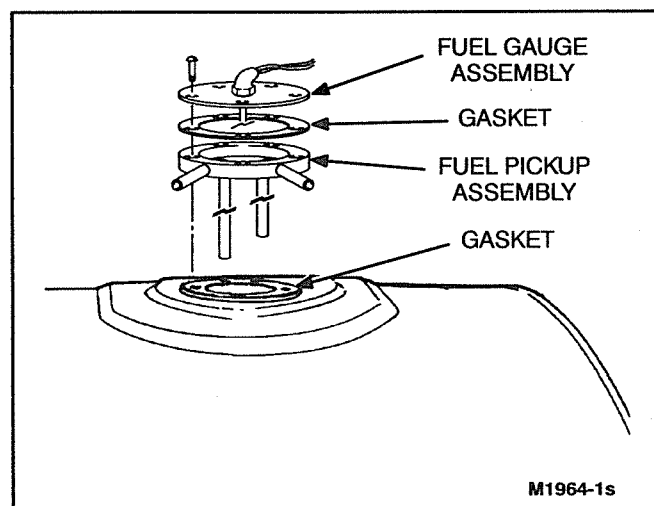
GAUGE SENDING UNIT PICKUP ASSEMBLY
